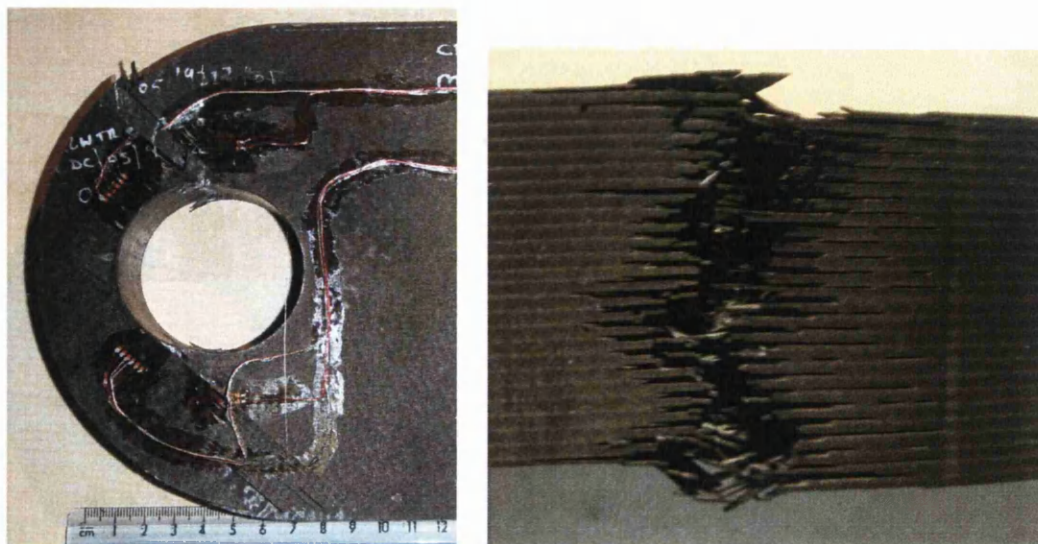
a) Large Lug Failure at 45° to Loading Direction b) the Fracture Surface on the end of the Same Lug
